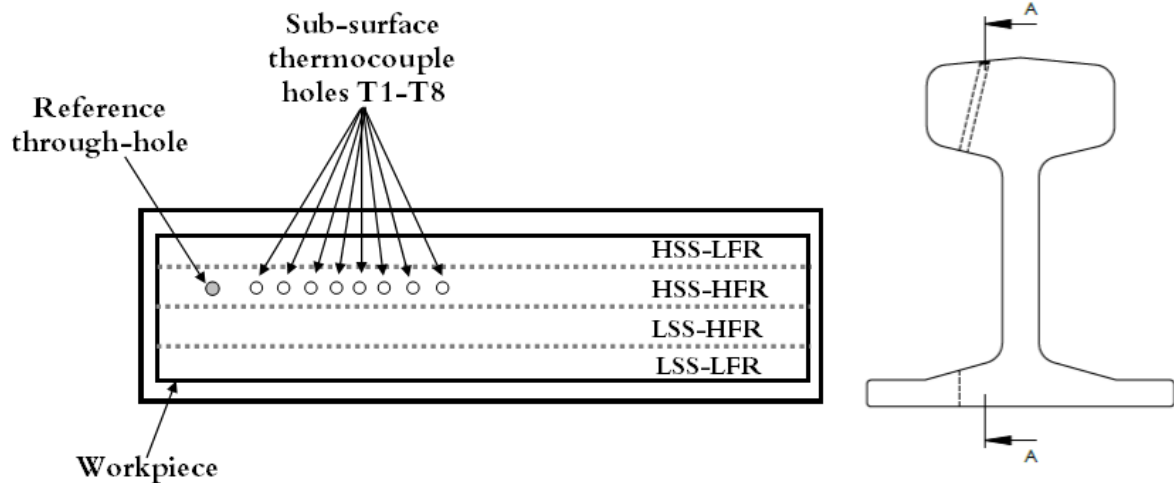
Schematics of (a) the thermocouple placement and test pass configuration on the ground rail workpiece (b) cross-section of location of thermocouple hole in rail Invalid source specified..
